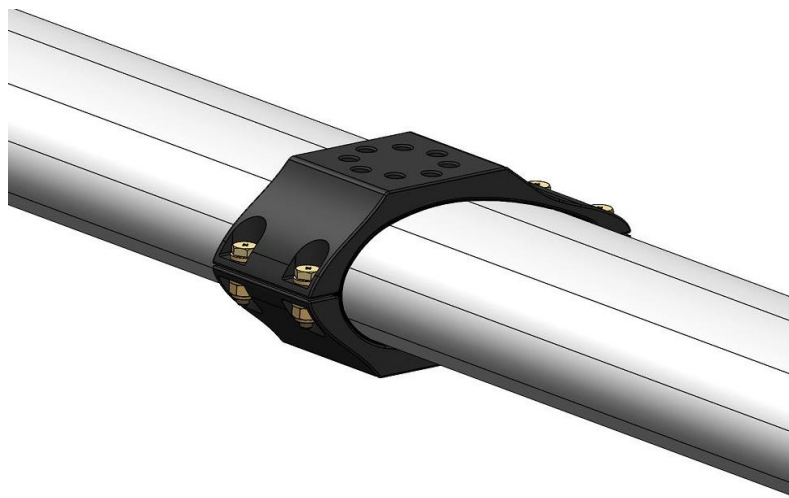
AFWM Mini Wing Strut Mount installed onto the Cessna Wing Strut
